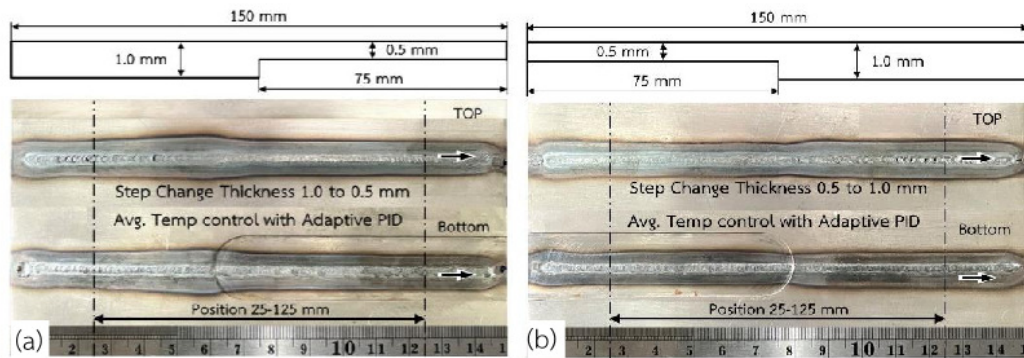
Showed the weld bead of laser welding of closed loop PID by control AVG. Temperature using varies gain value (a) Thickness 1.0 to 0.5 mm (b) Thickness 0.5 to 1.0 mm
